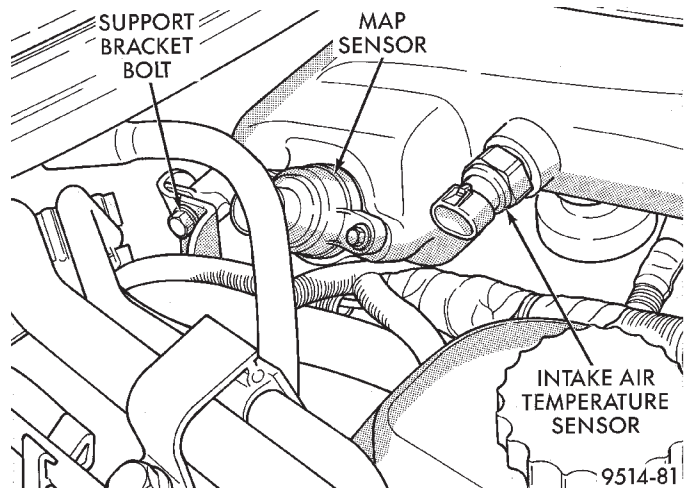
Intake Manifold Plenum Sensors and Left Plenum Support Bolt
